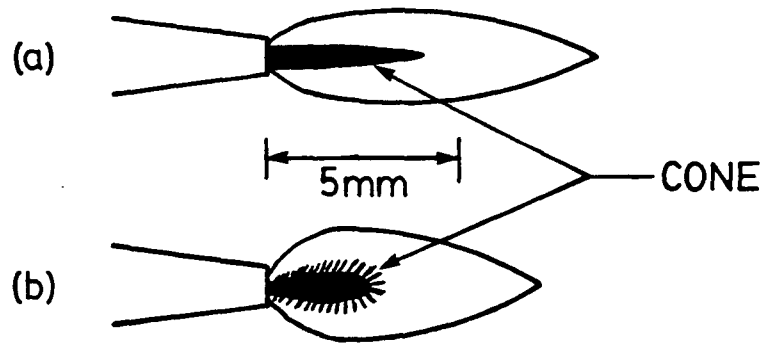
OXY-PROPANE TORCH FLAME SHAPES
